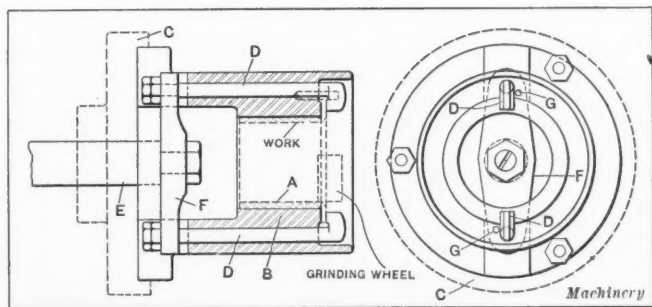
Recommended Method of holding Thin-wall Bushing for Internal Grinding to prevent springing out of Shape
